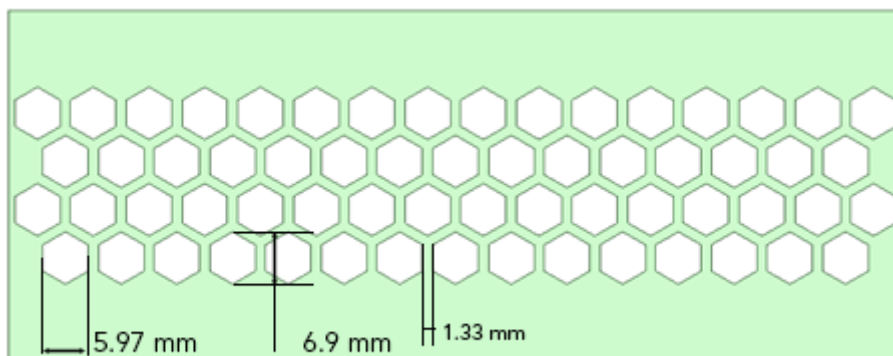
Dimensions for the Hexagonal shaped outlet hole pattern.
